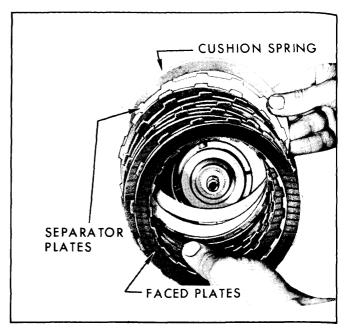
Removing Forward Clutch, Clutch Pack
